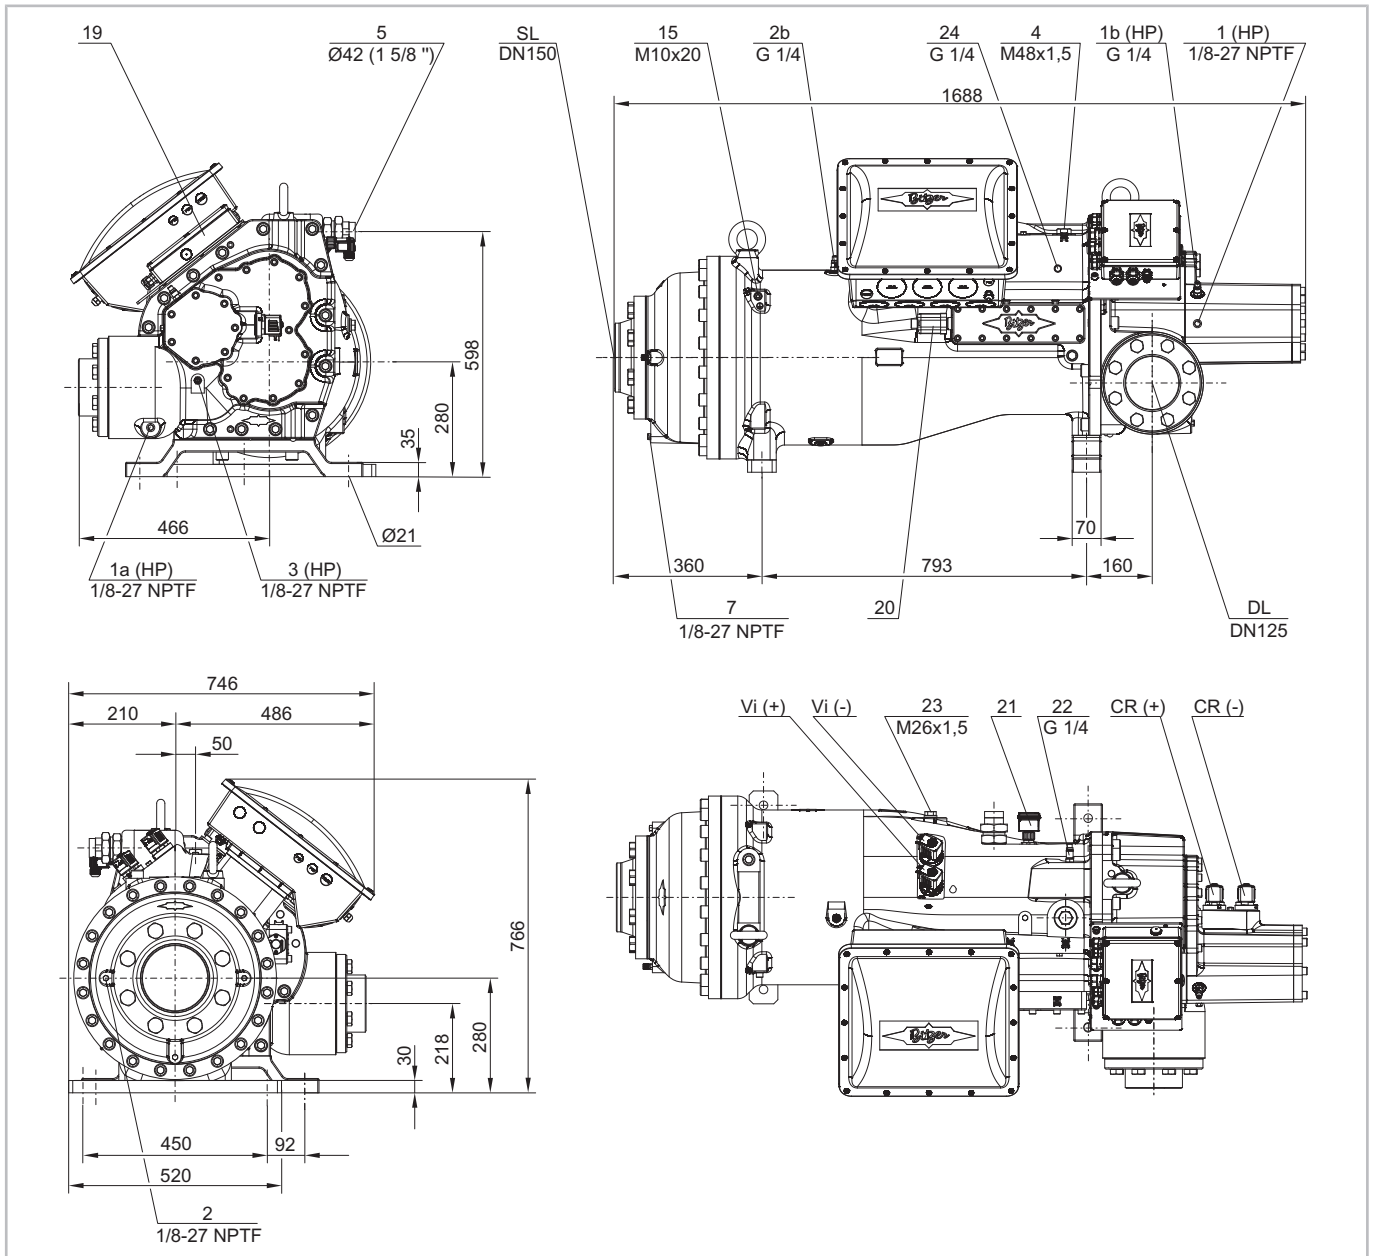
Dimensional drawing HS.9593 and HS.95103
